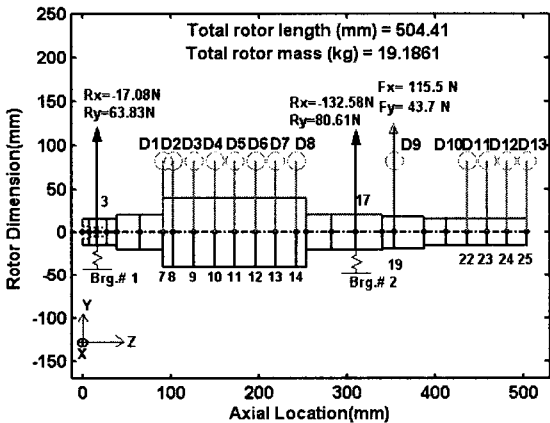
Full FE model of Y screw rotor including lobe & gear ( $F_x, F_y$ : gear load,  $R_x, R_y$ : bearing reaction load)
